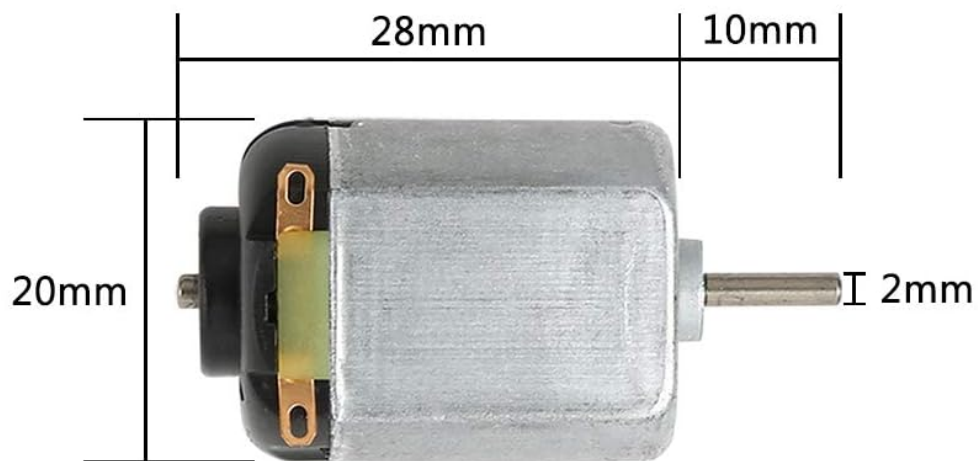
Detailed dimensions of the mini DC motor included in the kit.
